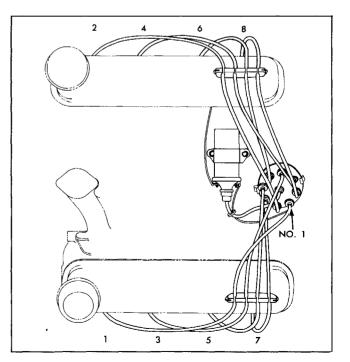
Arrangement of Spark Plug Wires in Wire Support
